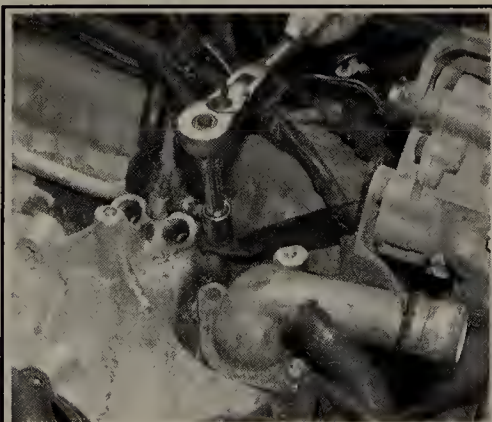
Remove the retaining bolts, then remove the AIR pump brace
